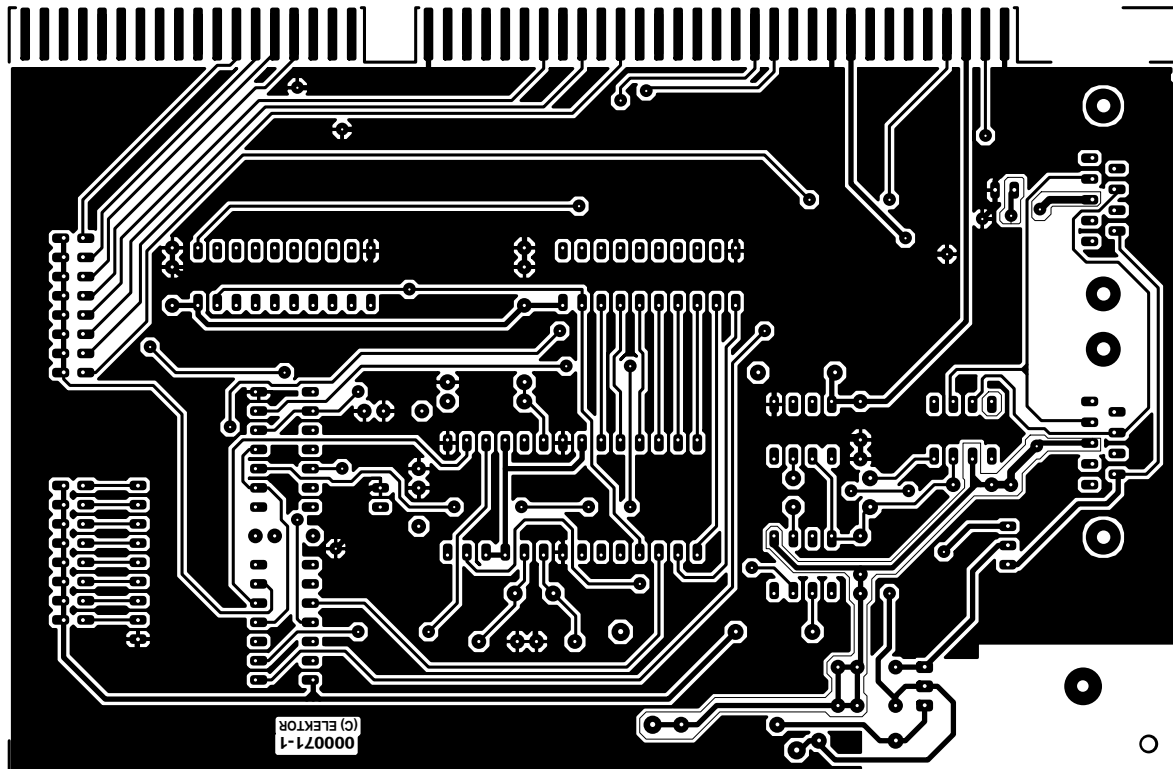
Copper track layout and component mounting plan of the PCB designed for the CAN adapter card (board available ready-made).
